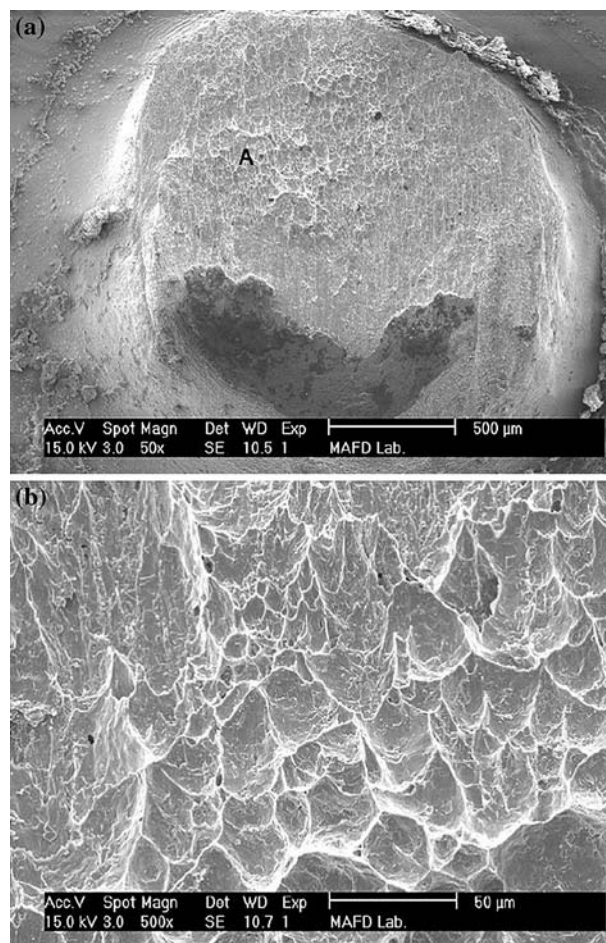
The fracture surface images of Sn-3.5Ag after isothermal storage at 150°C for 625 h: (a) whole fractured solder joint and (b) magnified image of area A.
